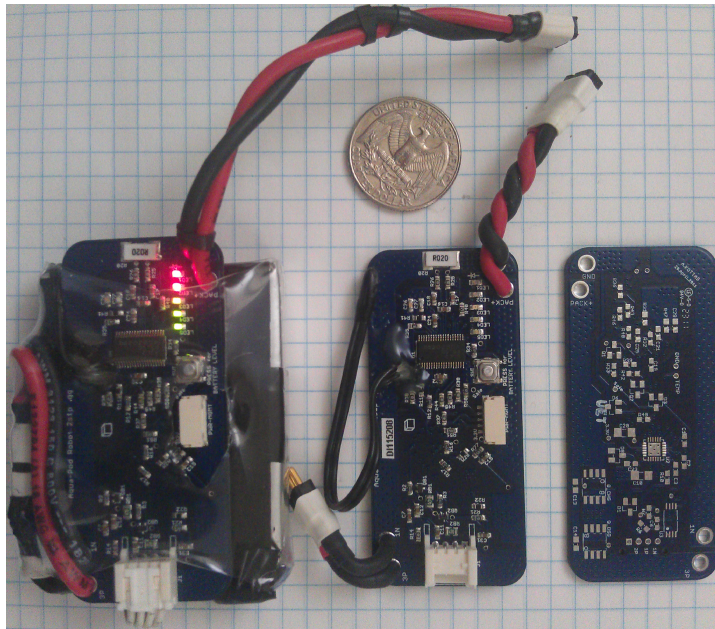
From right to left: back side of the fabricated (bare) fuel-gauge PCB; top side of the same PCB, but populated with components; the $2s1p$ LiPB pack with fuel-gauge PCB mounted on top.
